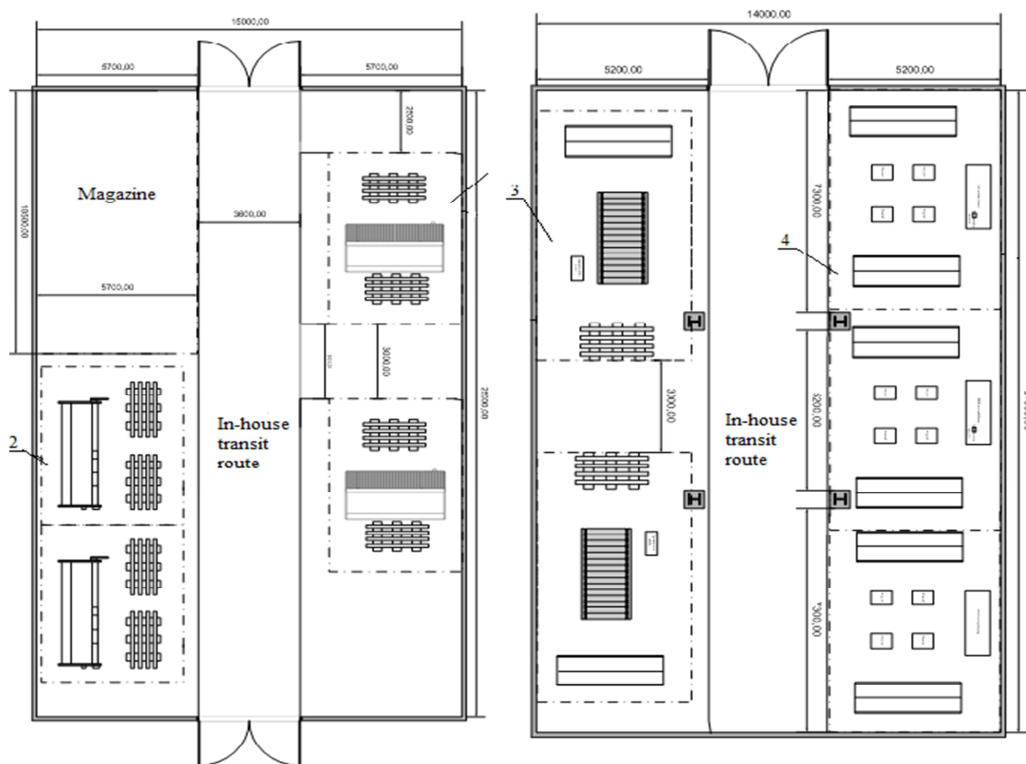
The proposed arrangement of workstations on the shop floor I and II
